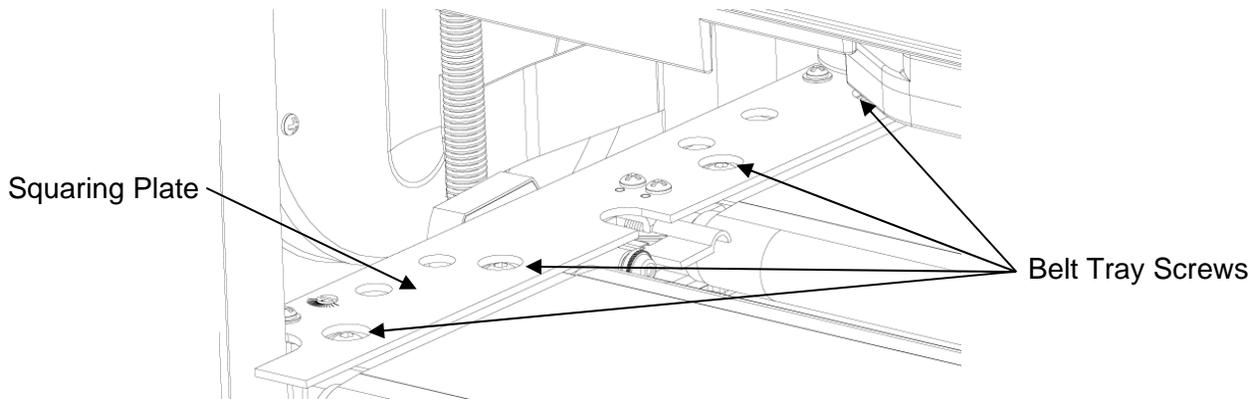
VIEW OF THE BELT TRAYS AND SQUARING PLATE (LEFT SIDE)
